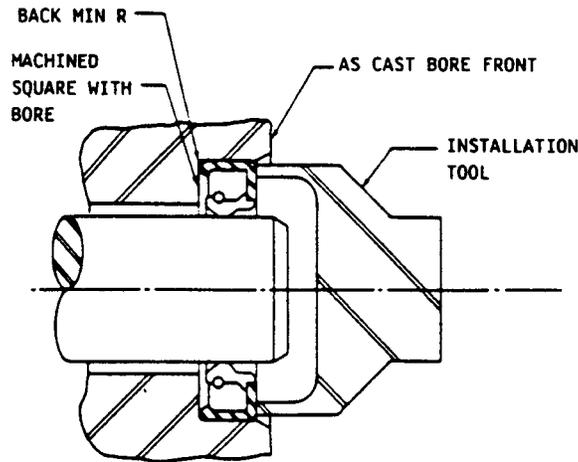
BOTTOM BORE: SEAL BOTTOMS ON MACHINE BORE SHOULDER CONFORMS WITH ISO 6194/3
